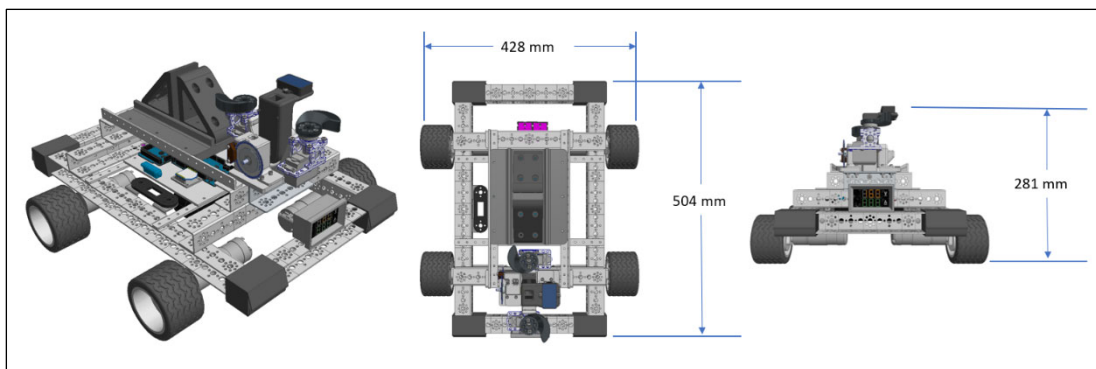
Penny cart CAD model: isometric view and maximum outer dimensions.
